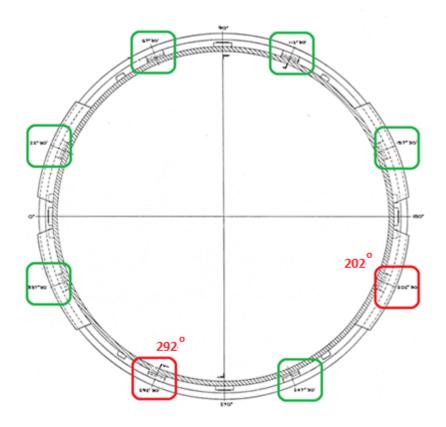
Salem Unit 1 Thermal Shield Support Block Layout, Failed Cap Screws in Red (From Top Looking Down)
